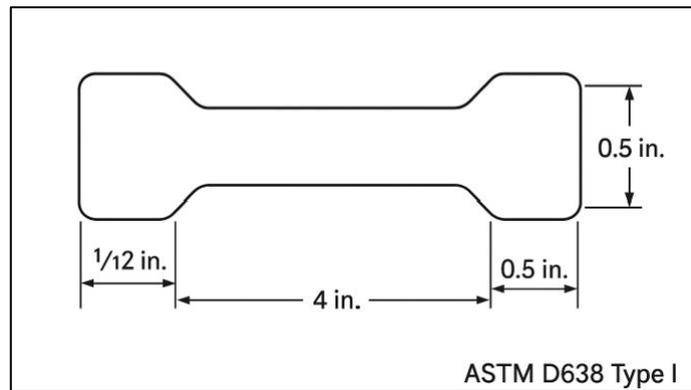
Standard dumbbell shaped specimen geometry (ASTM D638 & ISO 527-2).
